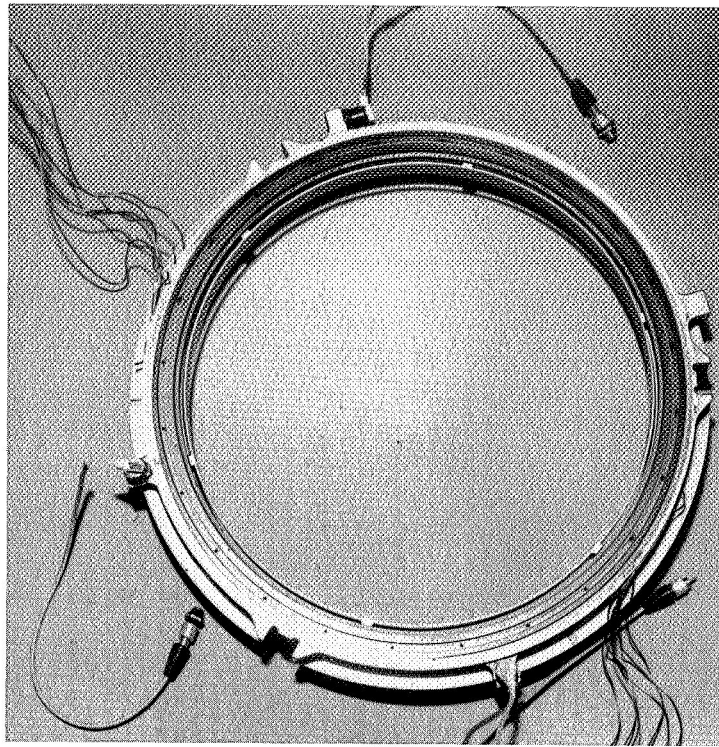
Oil-Film Nosepiece Assembly After Build 2 Dynamic Testing (XP-94852)
